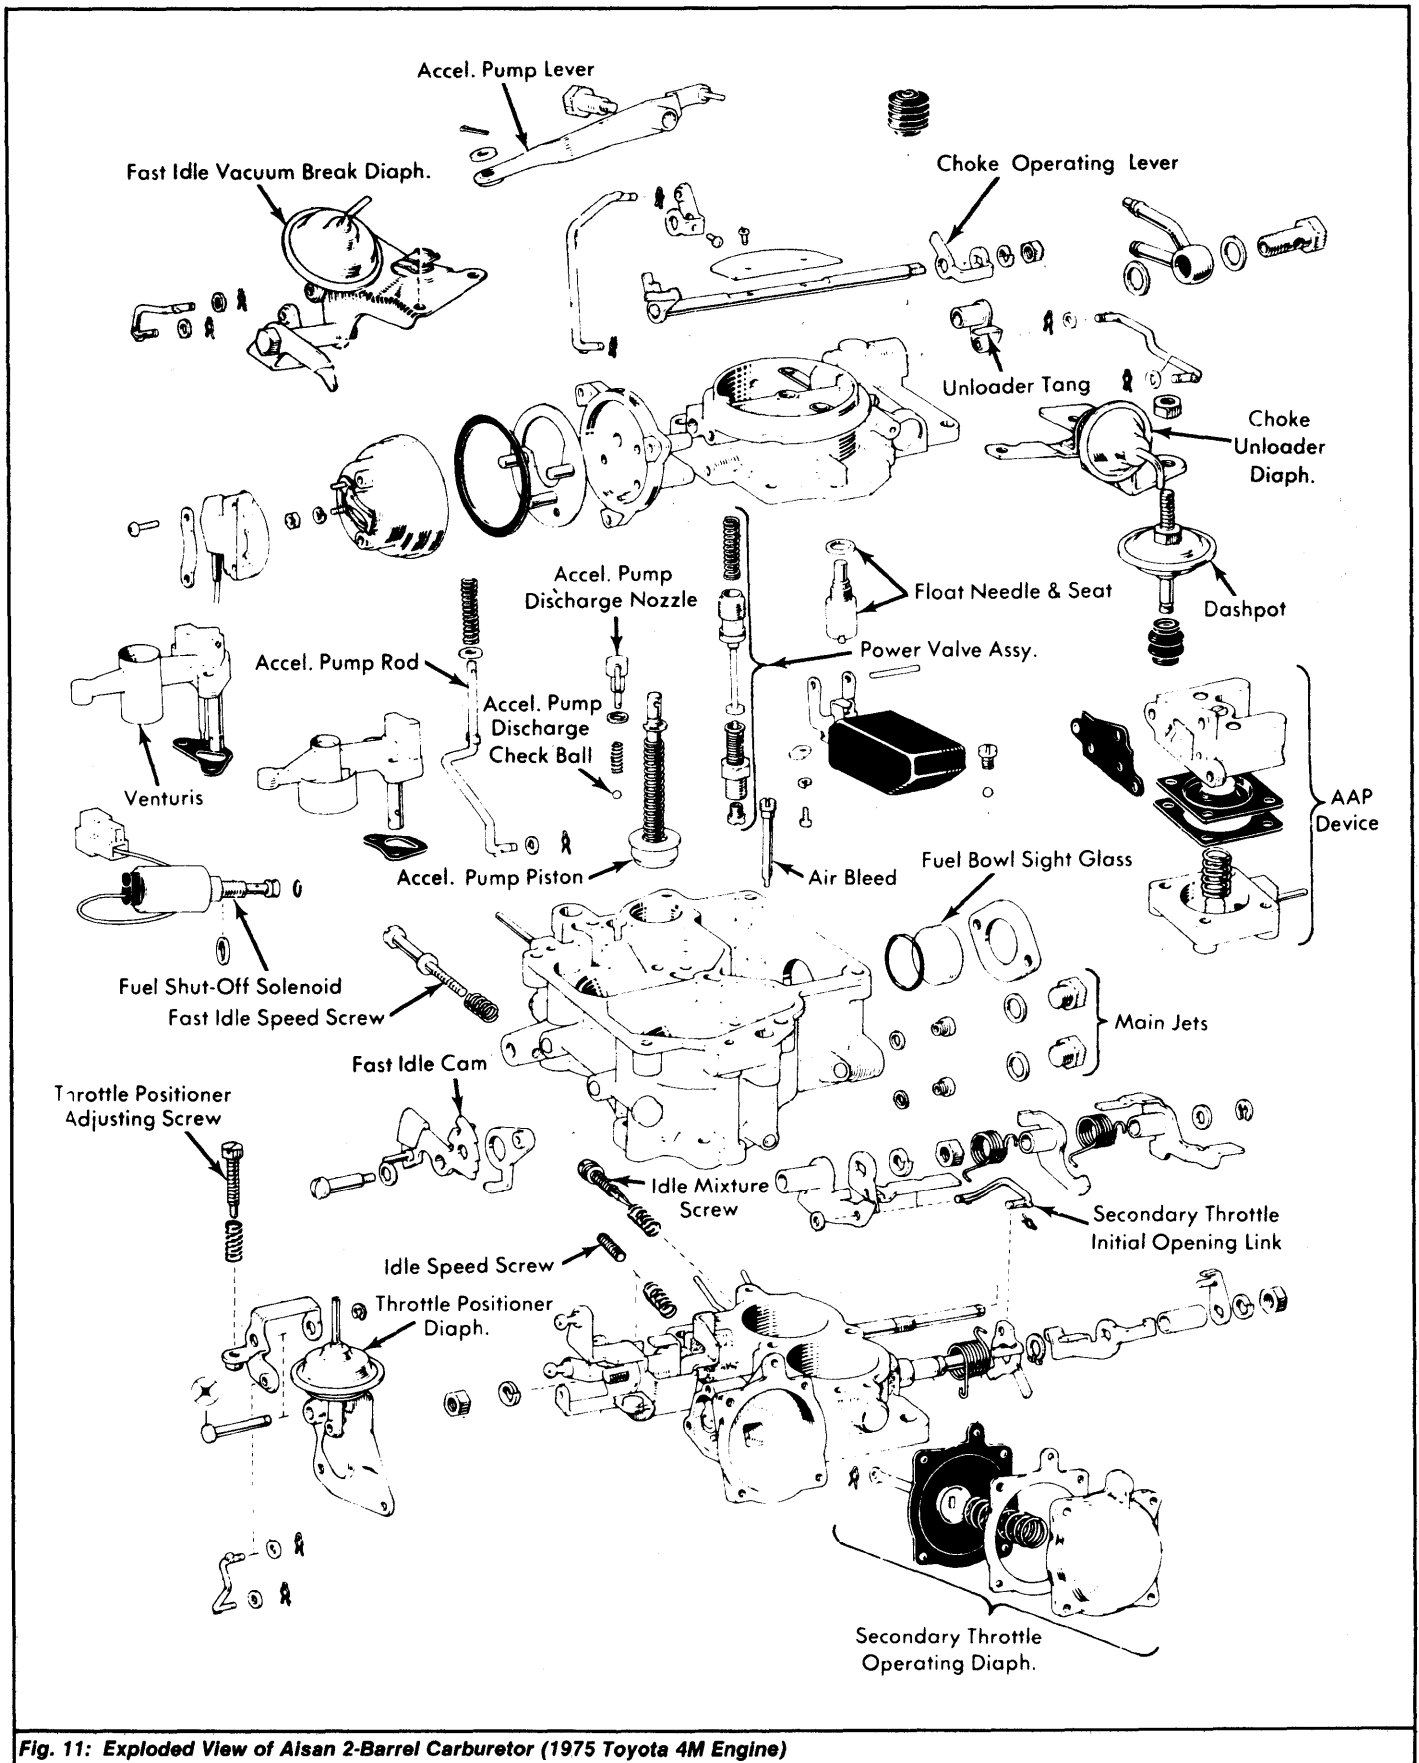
Exploded View of Aisan 2-Barrel Carburetor (1975 Toyota 4M Engine)
